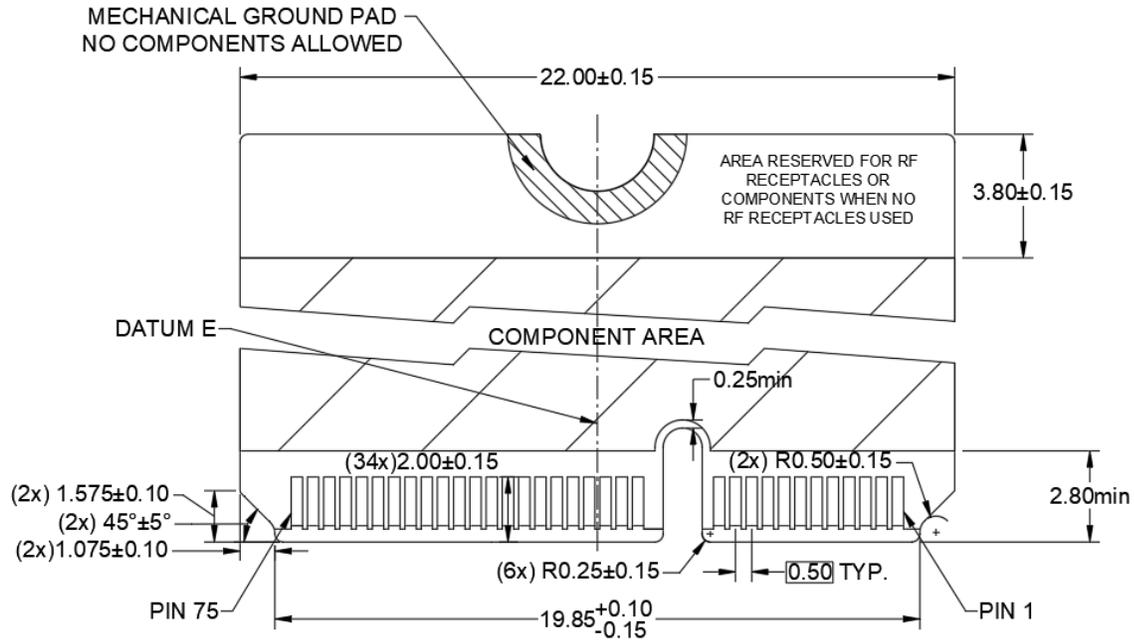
M.2 22XXX-XX-X-1A(B) Card Edge Outline Top-side
